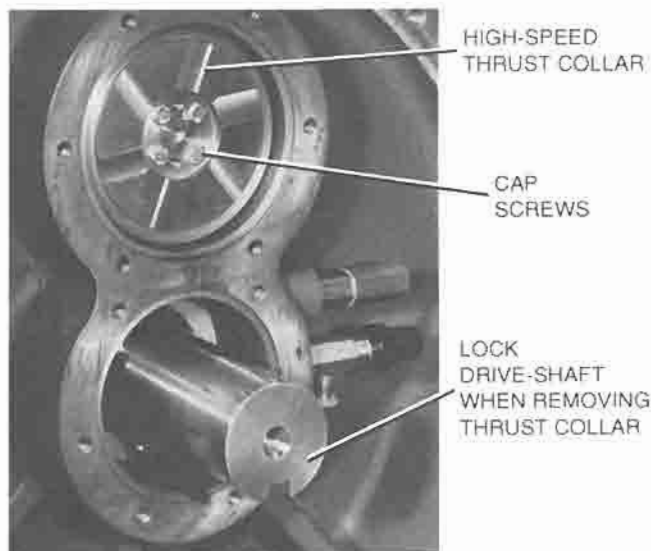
REMOVING HIGH-SPEED THRUST COLLAR
